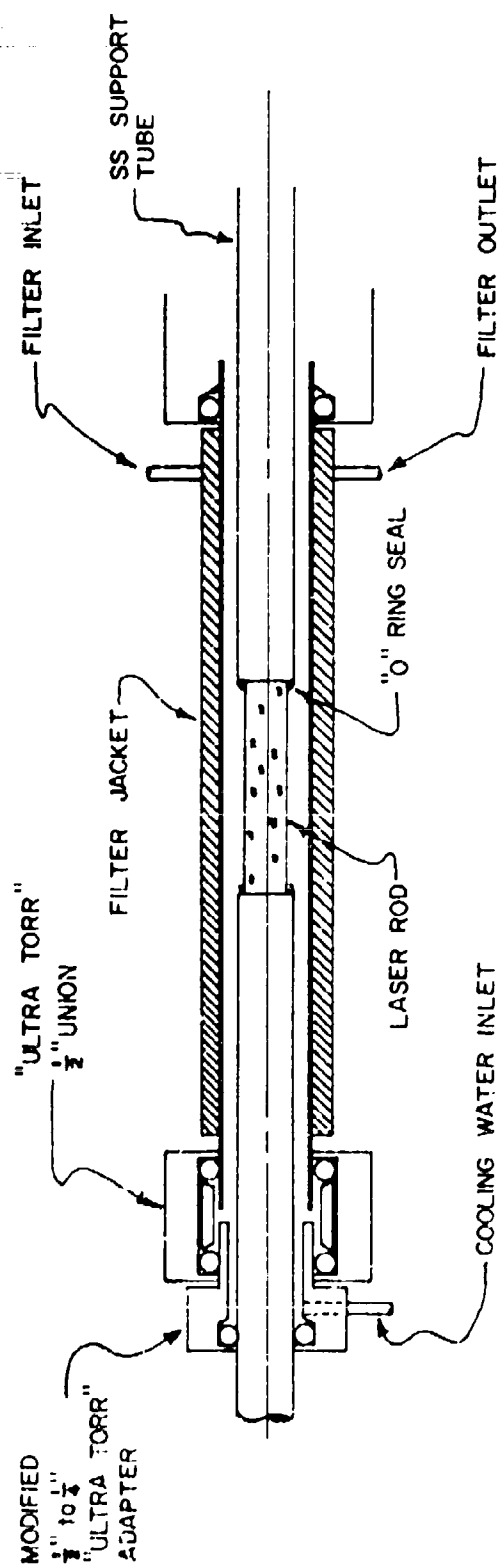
The Water Cooled Laser Rod Holder and Liquid Filter Assembly Fabricated at University of Dayton Research Institute to Hold a Variety of Laser Rods.
